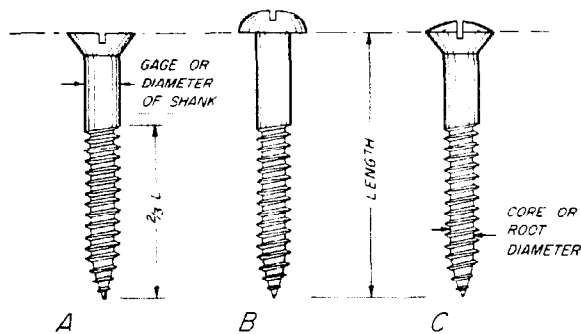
Common types of wood screws: A, flathead; B, roundhead; and C, ovalhead.
